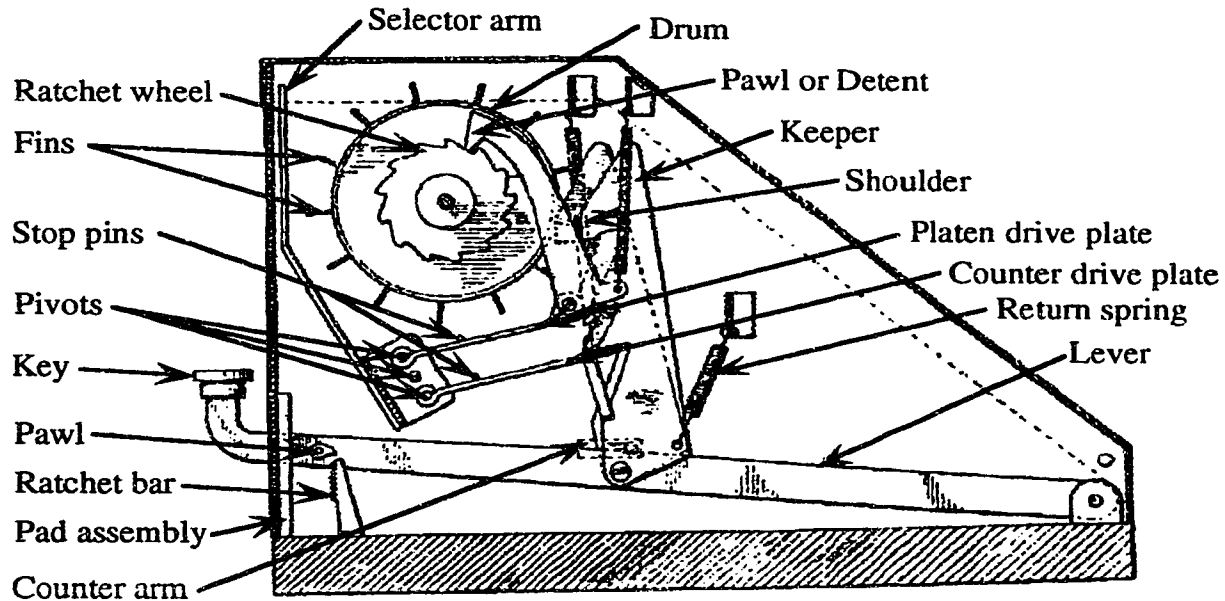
Cross-sectional view of Pressey's machine of 1926 in teaching mode
